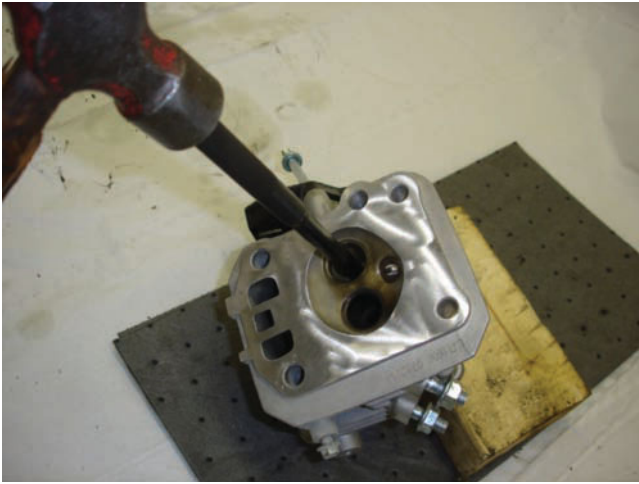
Driving the guide out from the combustion chamber side of the cylinder head.
